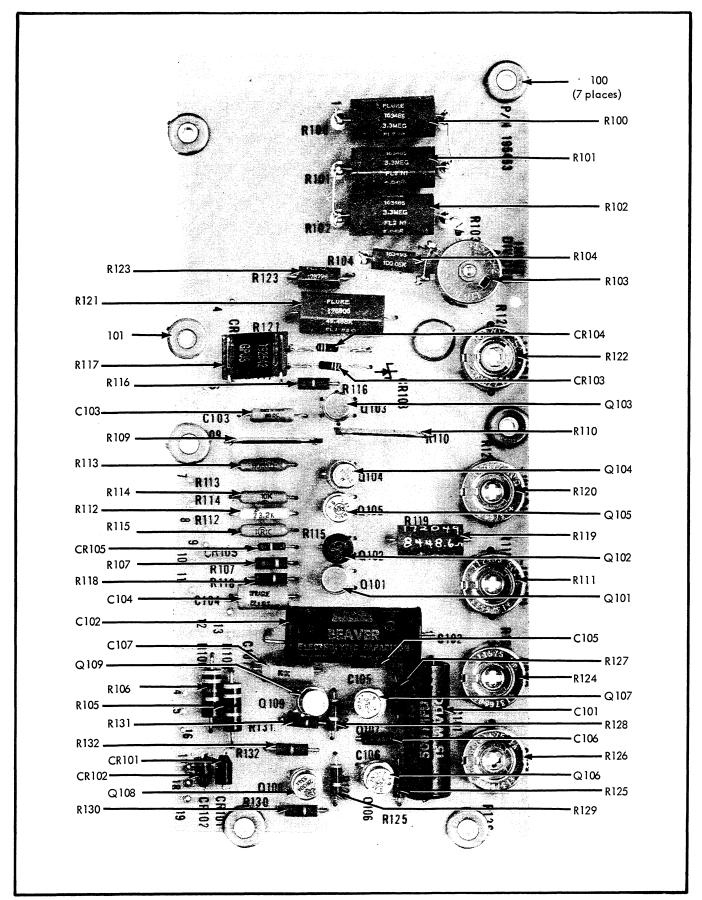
REFERENCE SUPPLY ASSEMBLY
